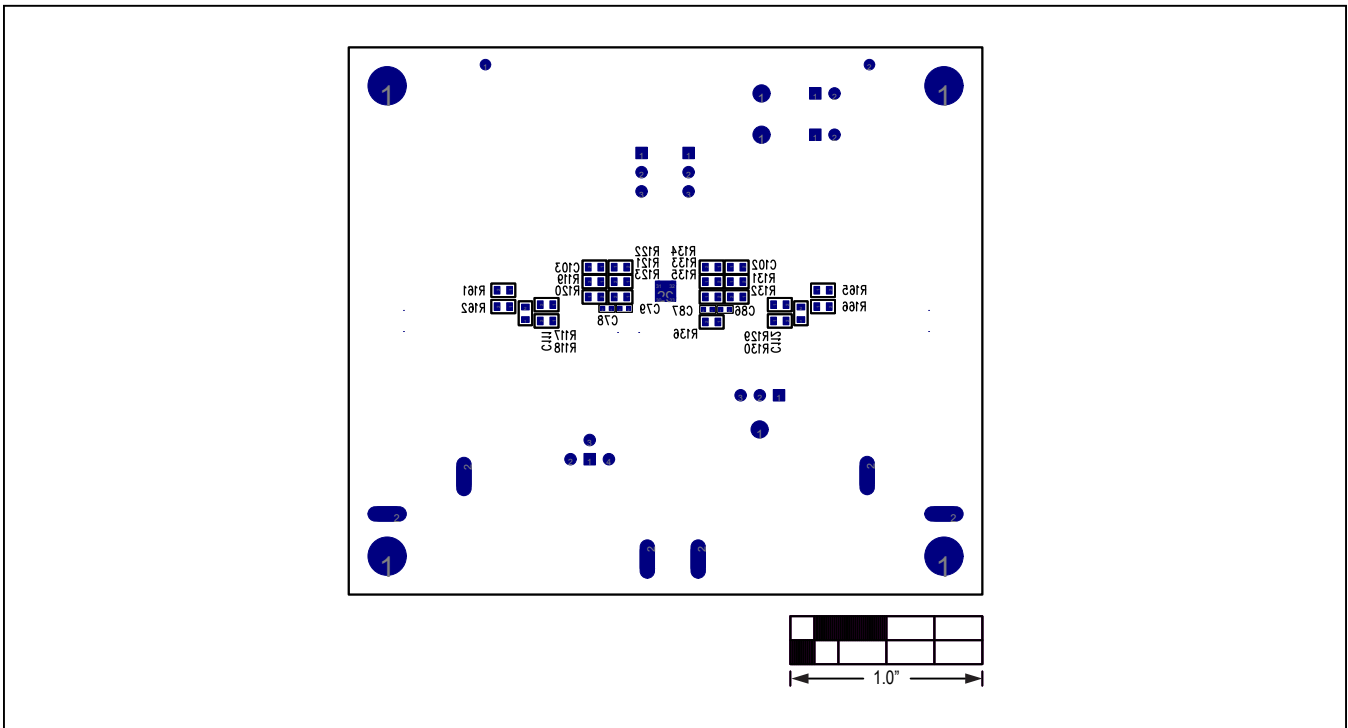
MAX16932 EV Kit Component Placement Guide—Solder Side
